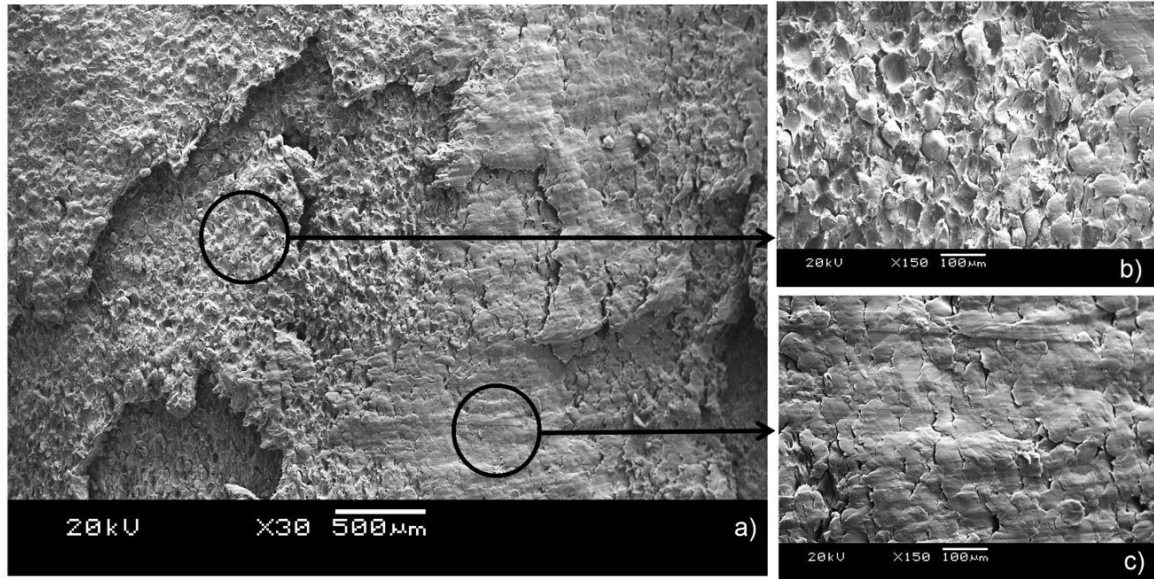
Compressive failure surfaces showing a) regions of failure, b) partially sintered material, c) worn path due to failure.
